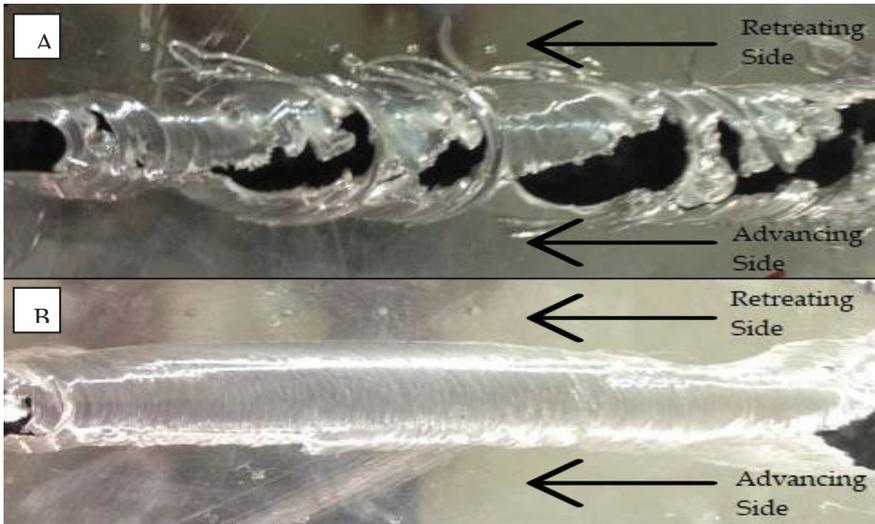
Welding quality for 3 mm thickness plate: (A) Tool 1 with 7° tapered and (B) Tool 2 with 5° tapered
